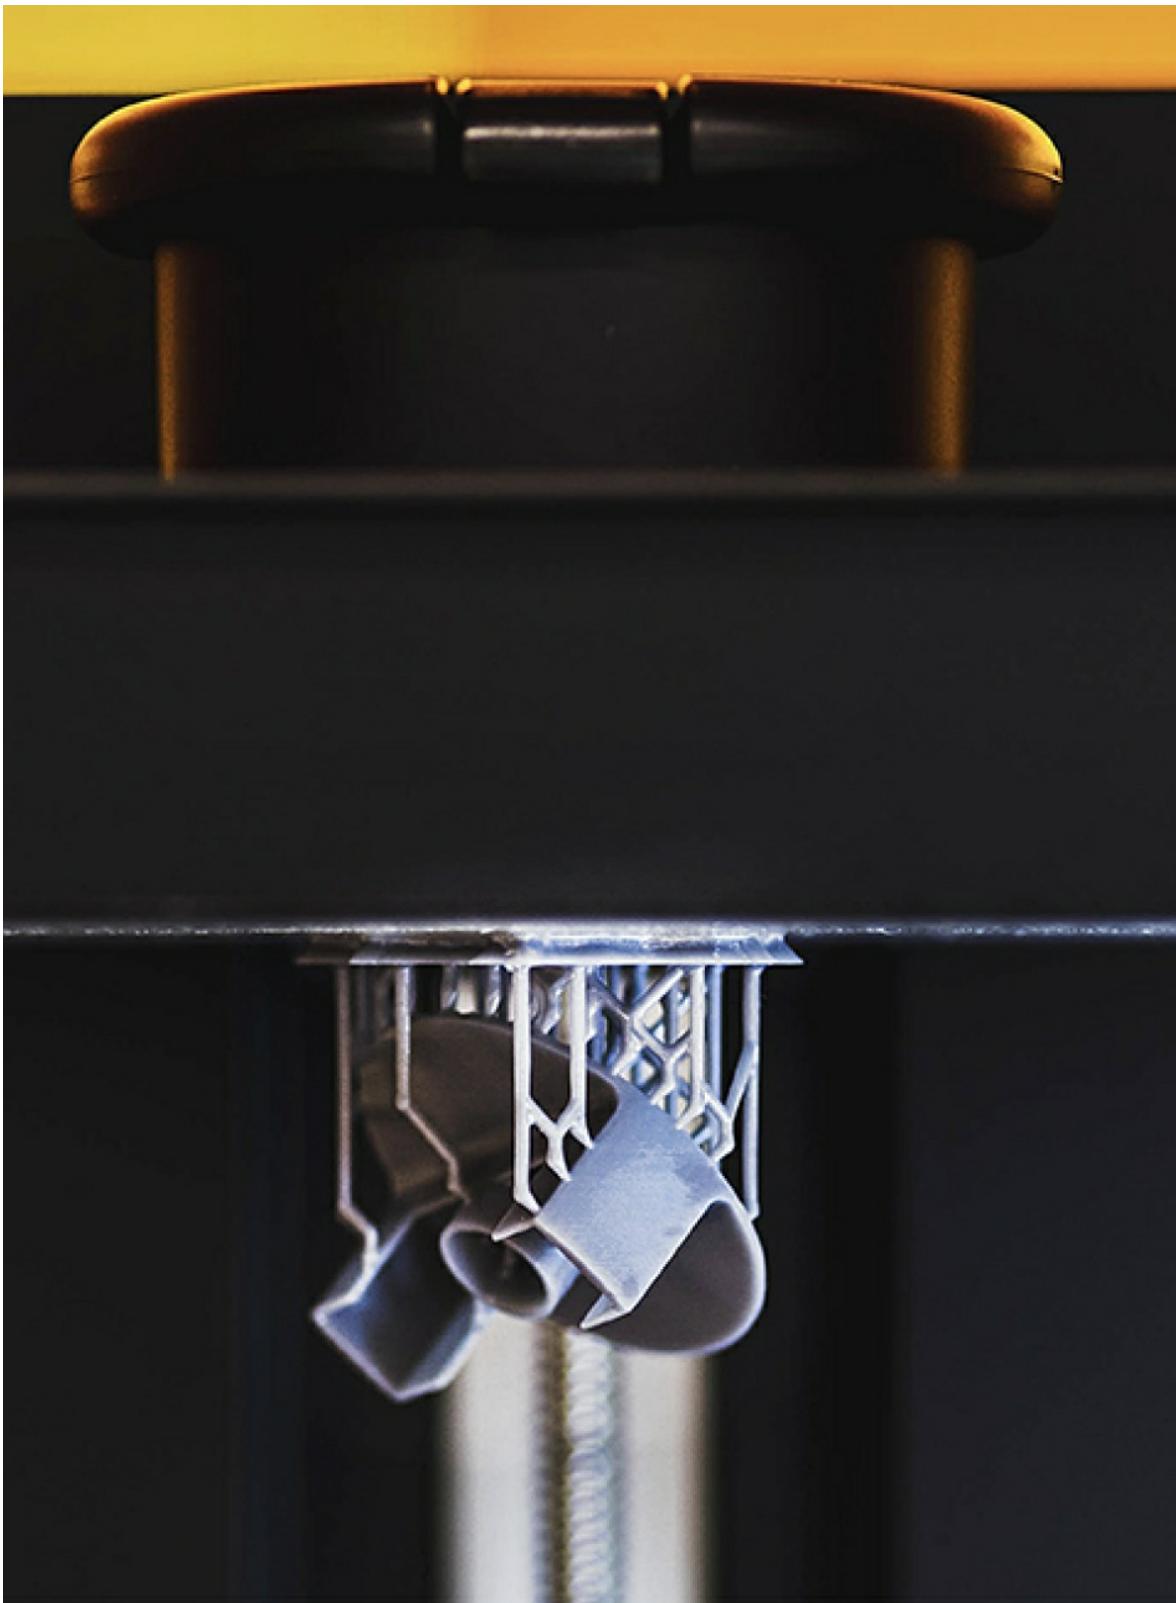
The finished shaft end cap on the Formlabs Form 2 before being removed from the build platform. Print time for the motor housing cap was approximately 1.5 hours
